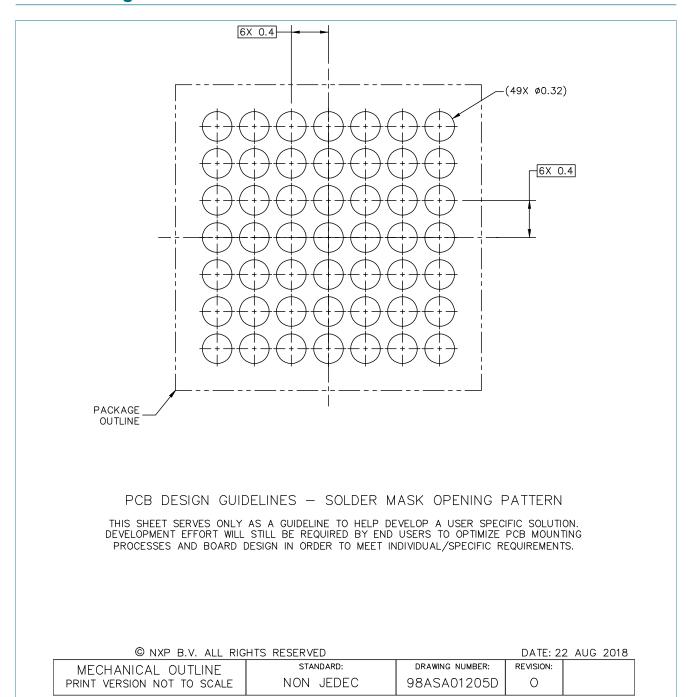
Reflow soldering footprint part1 for WLCSP49 (SOT1444-11)
